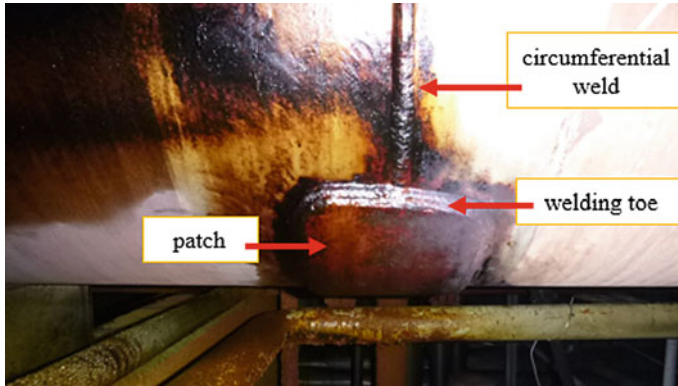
Fillet weld patch at different thickness weldment crack
